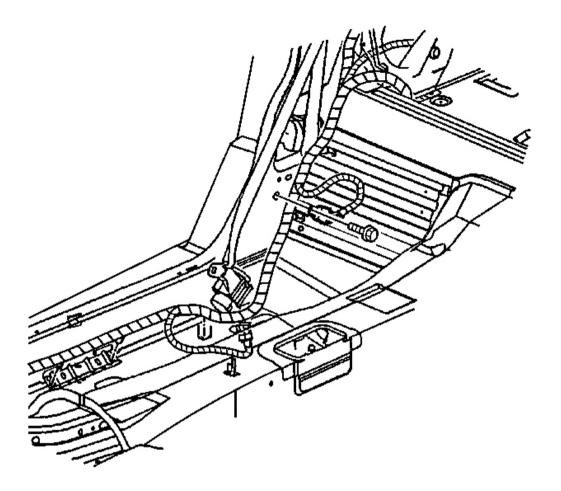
Power Antenna Coaxial Extension Cable At Front Body Wiring Harness Courtesy of GENERAL MOTORS CORP.
